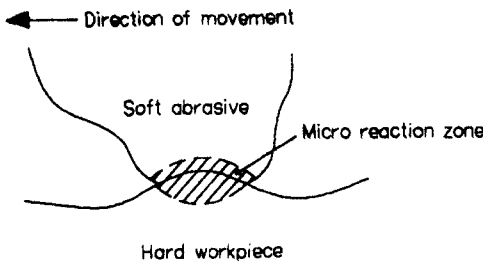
Schematic view of workpiece-soft abrasive (Contacting model)
